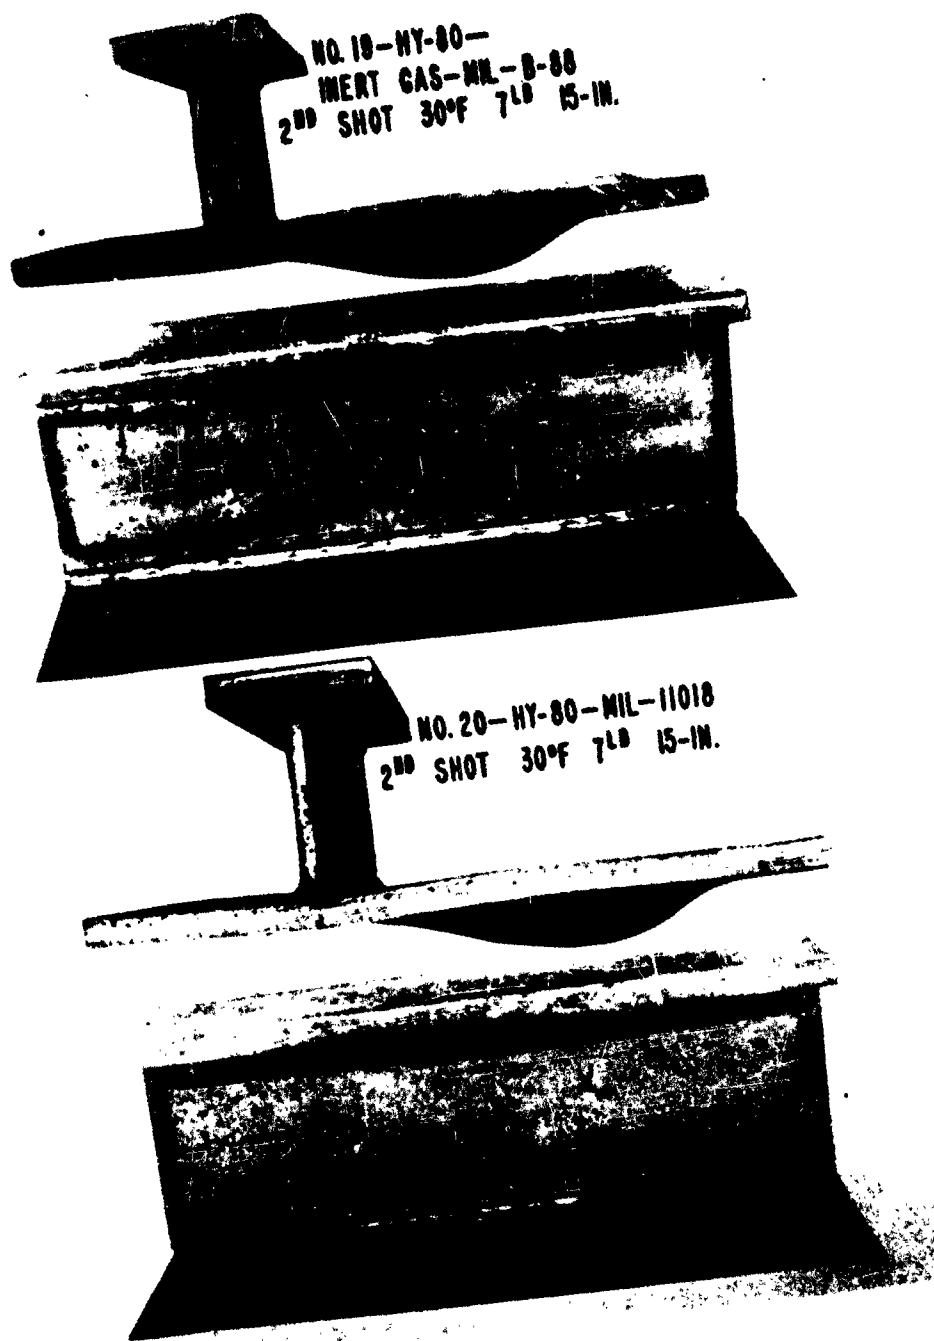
Test specimens No. 19 and 20 after two explosive shots.
